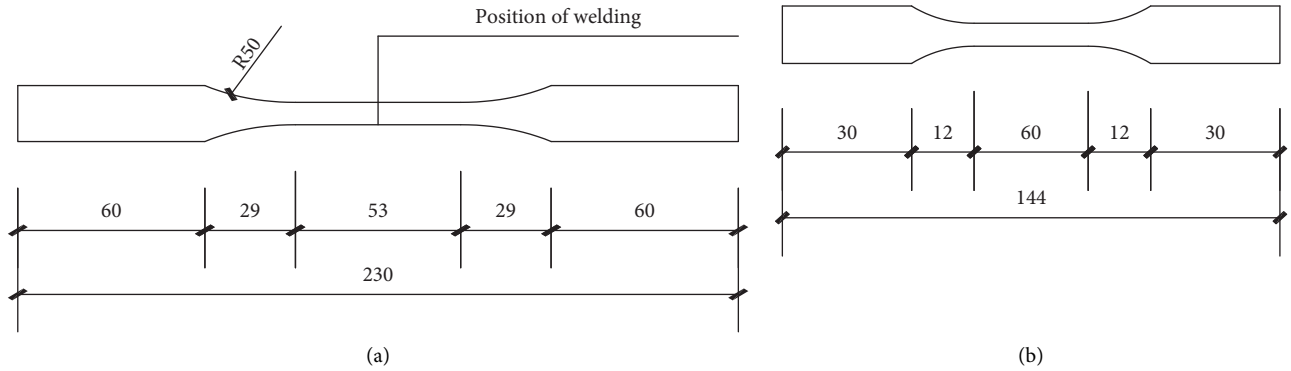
Specimen design (Units: mm). (a) Sheet material specimen. (b) Rod-shaped specimen.
